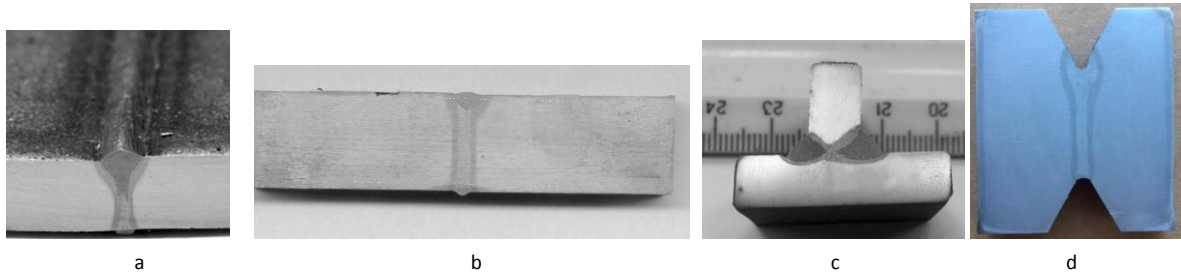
Macrosections of hybrid laser-arc welding joints: (a) butt-joint 7 mm and (b) 20 mm thickness, (c) T-joint 7 mm/7 mm thickness, (d) vertical welding 48 mm thick
